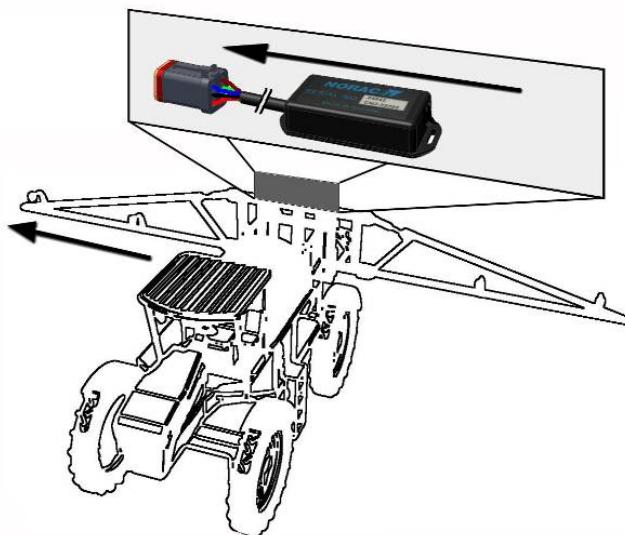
Roll Sensor Orientation - Connector Facing Right Wing
